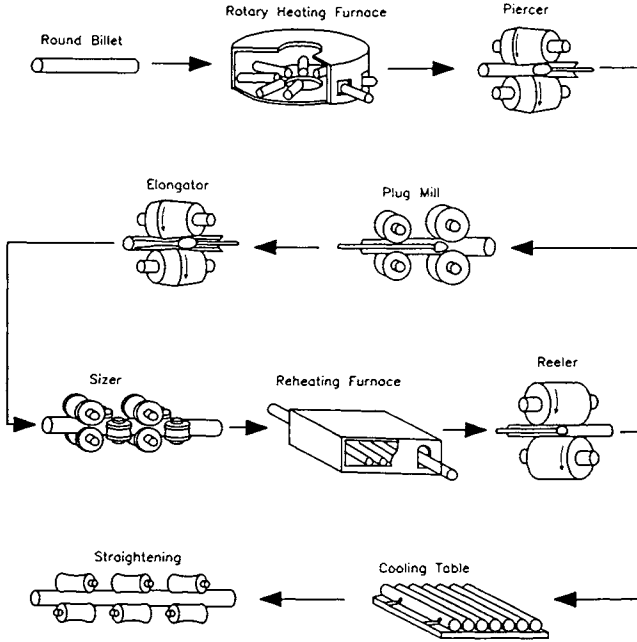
Plug Mill Rolling Process for Kawasaki's 7-16 $\frac{3}{8}$ in. pipe. (Courtesy of Kawasaki Steel Corporation.)
